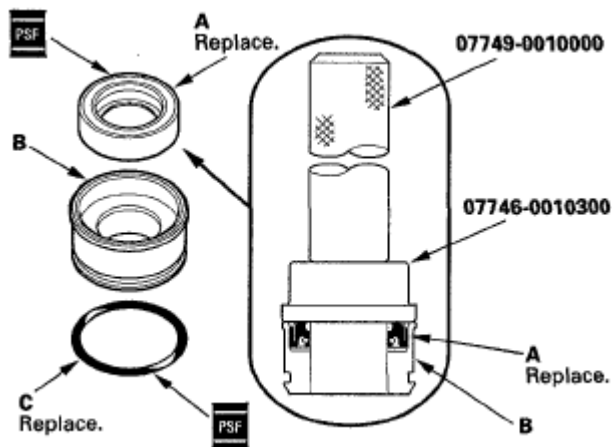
Identifying Coating Inside Surface Of Cylinder Seal With Power Steering Fluid
